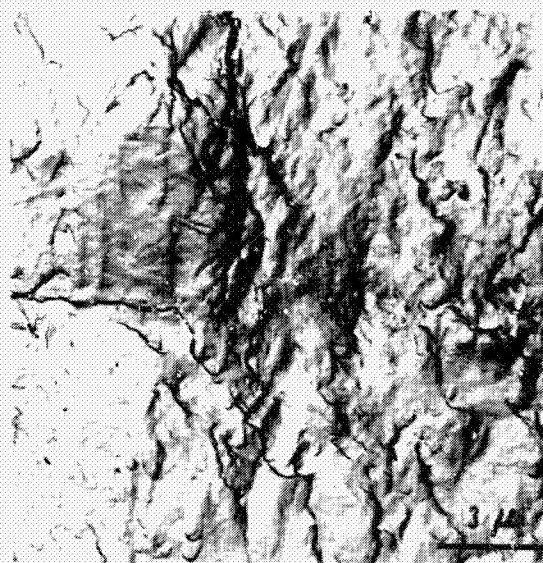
FRACTURE SURFACE OF WELD SAMPLE 2-11
